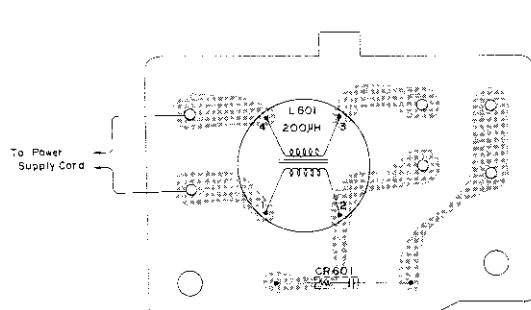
Bottom View of AC P.C. Board, PC-011 (USA/Canada)
